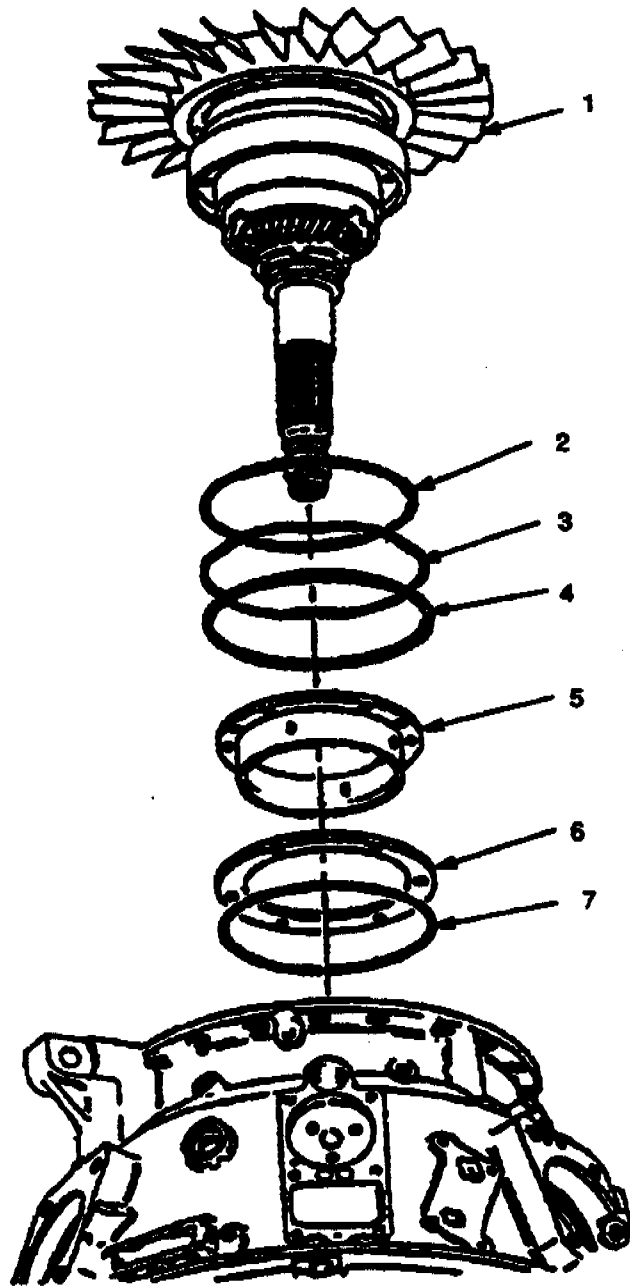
Compressor Rotor Assembly Removal and Installation.
